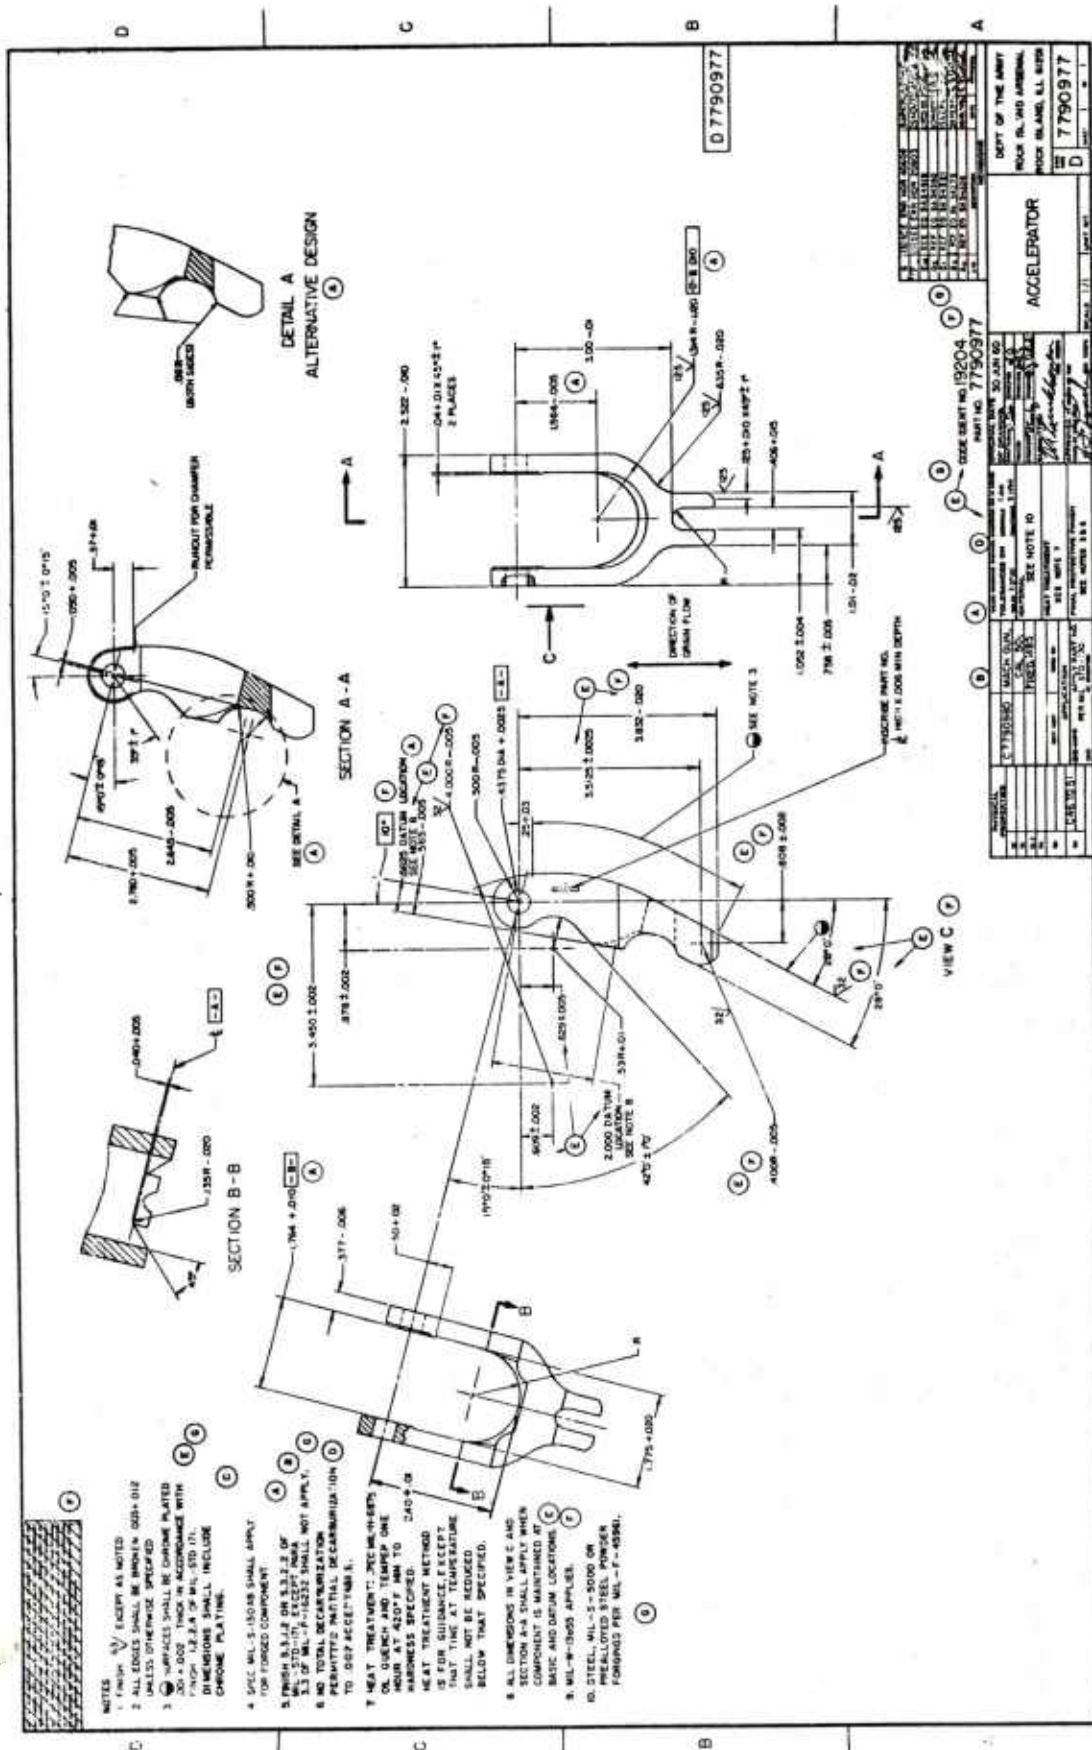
Accelerator for the M85 Model 50 Caliber Machine Gun.
